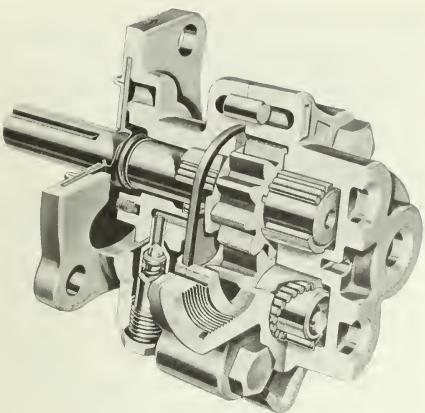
Cutaway of external-gear pump, showing the outlet side. This pump has a built-in pressure relief valve.
